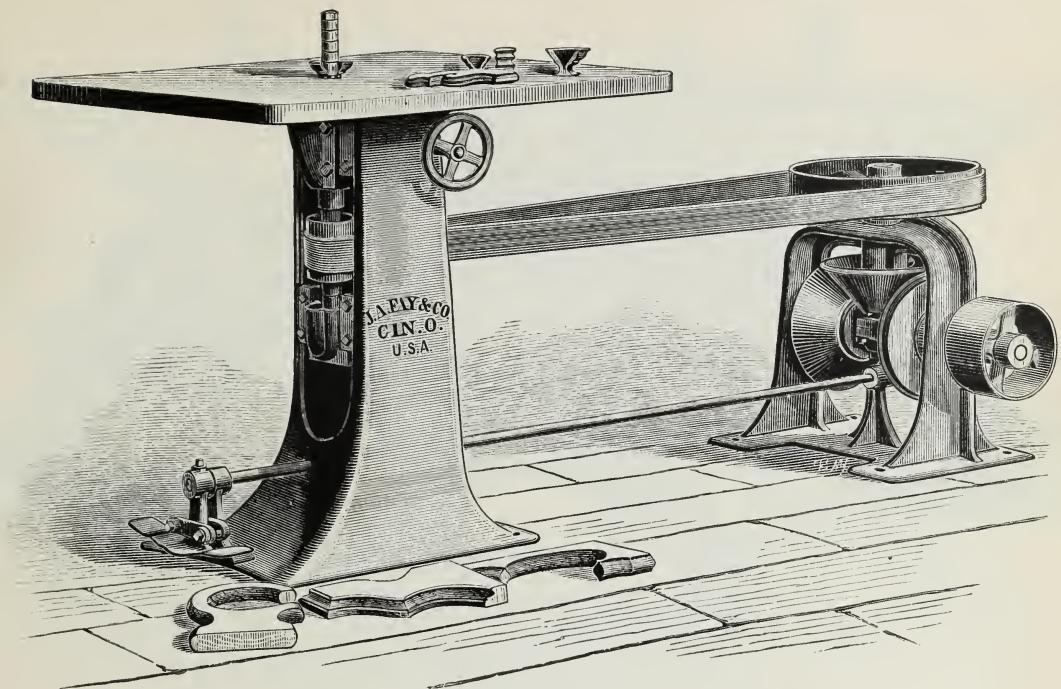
FIG. X.—MACHINE ARRANGED FOR CIRCULAR MOLDING.
